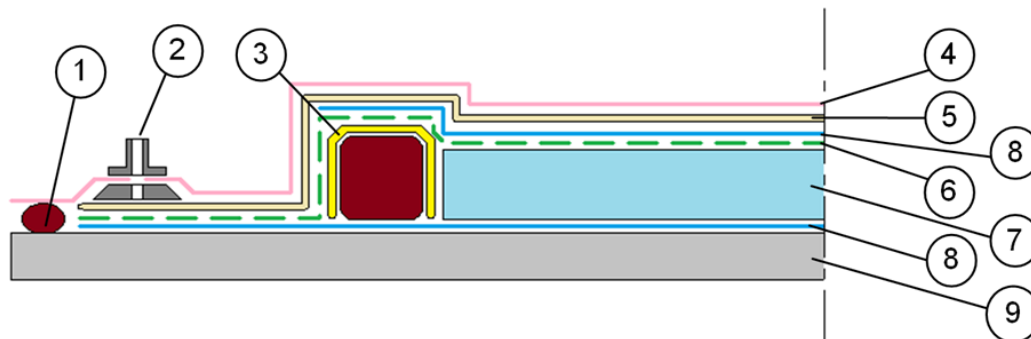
Bagging method; 1) sealant tape; 2) vacuum valve; 3) glass fabric; 4) bag; 5) breather; 6) perforated film; 7) stack; 8) release film; 9) tool
